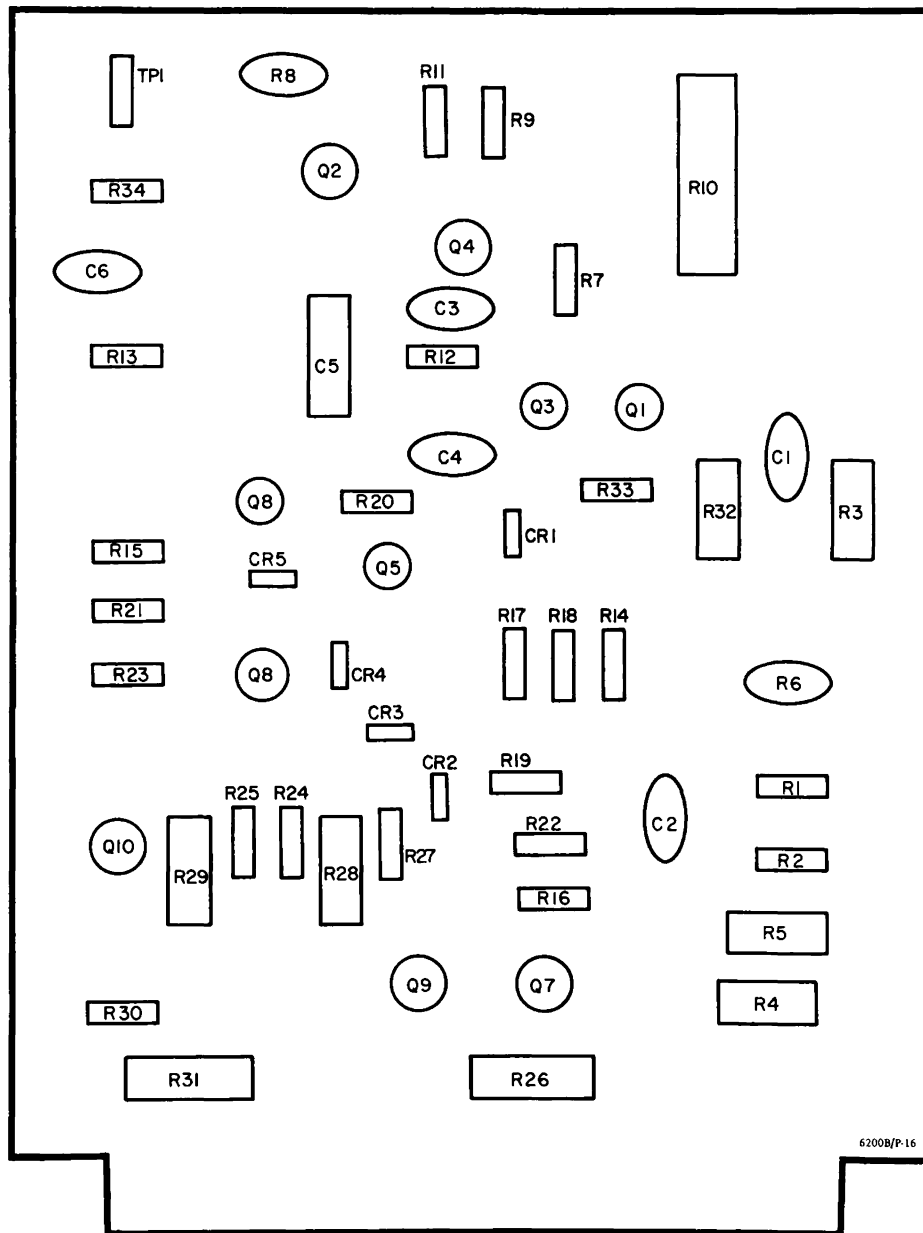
Component Location, Base Step Amplifier Assembly A14
